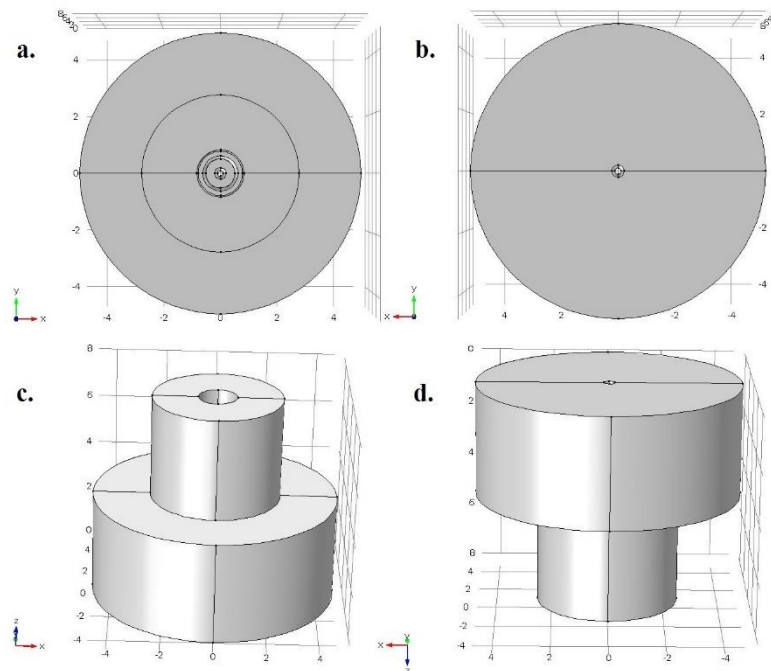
Schematic illustrations of top and bottom views of piston lower end type 2, (a. top view, b. bottom view, c. top inclined view, d. bottom inclined view)
